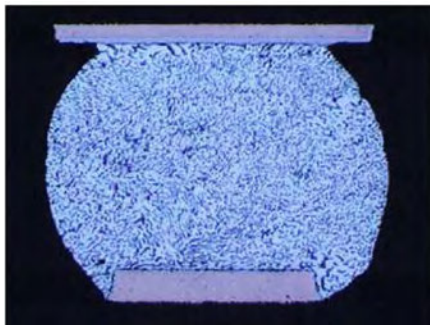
BGA solder joint: tin/lead alloy in a tin/lead process.
